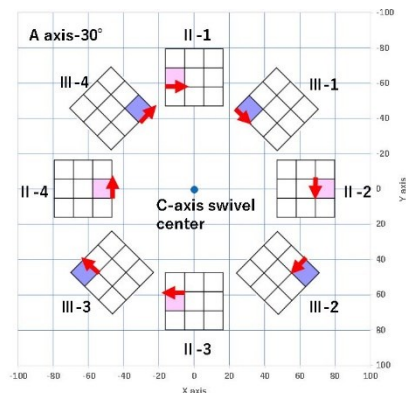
Cutting position of each ZONE viewed from the front of the machine
